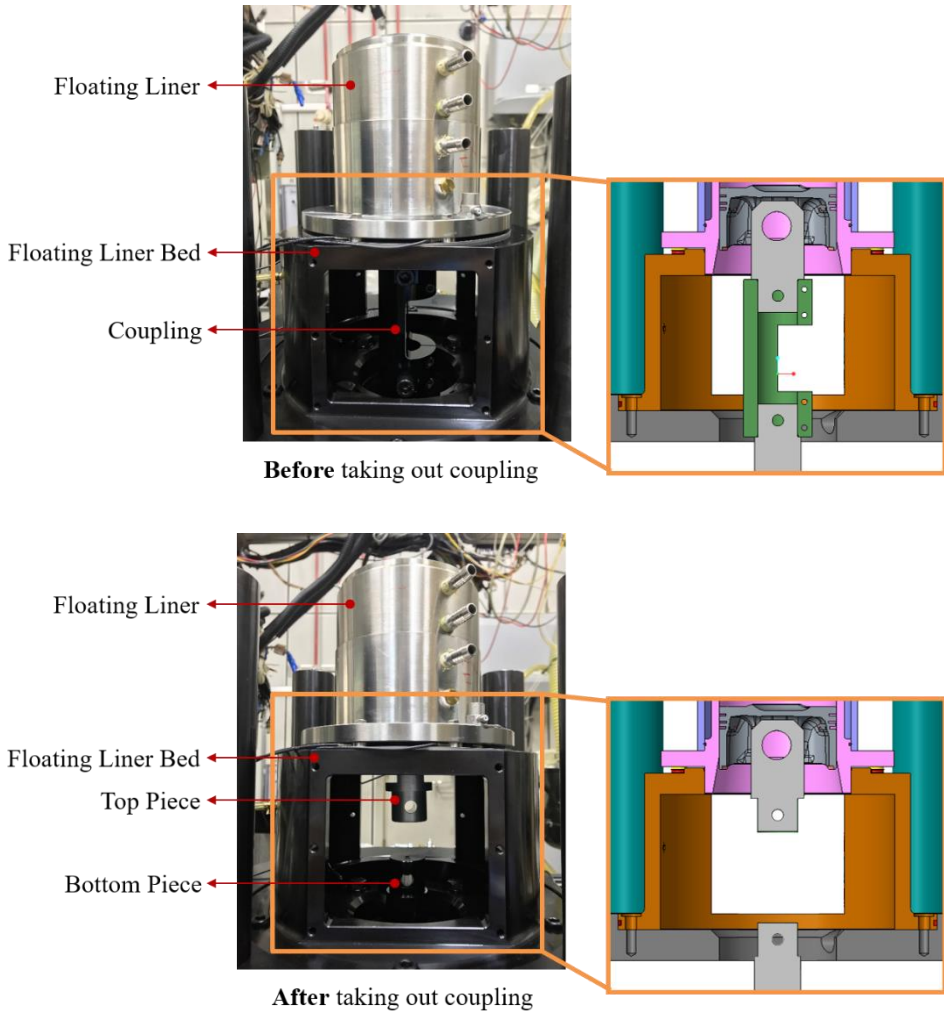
Piston disassembly process – 3 pieces extended con-rod
